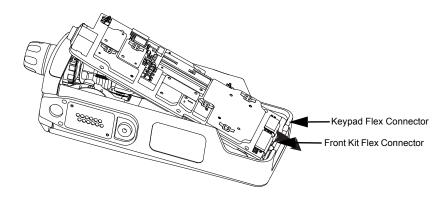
Unplug the connectors on the Front Kit Flex and Keypad Flex
